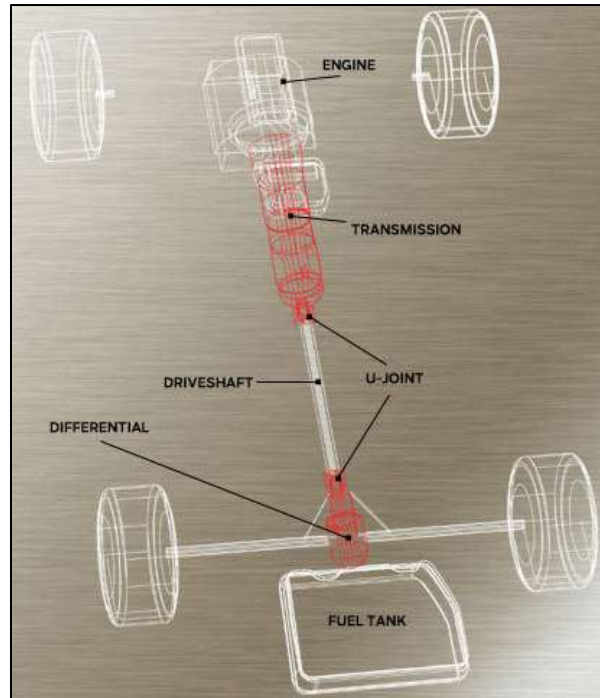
Rear-Wheel Drive Layout (Chaikin, 2004)
